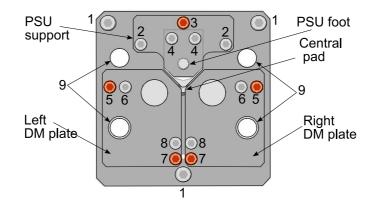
The optical plate with PSU in its holder and two DIMM mirrors alignment plates. 1 — screws M2.5 fixed plate to device, 2 — pull alignment screws M2 of the PSU support, 3 — push screw M2 for PSU tilt alignment, 4 — PSU lock screws, 5, 6 — push and pull screws M2 for alignment of the DIMM mirrors tilt in X direction, 7, 8 — push and pull screws M2 for alignment of the DIMM mirrors tilt in Y direction, 9 — windows for mask fixing screws.
